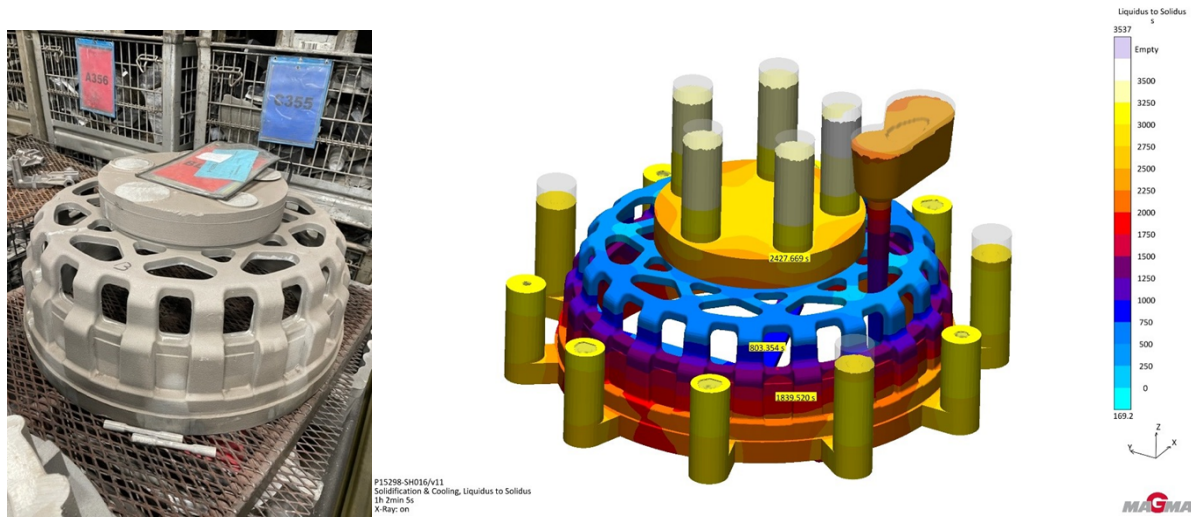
A) Component SH016A after rough cutting and before final machining, and B) an example of the casting simulation output.
